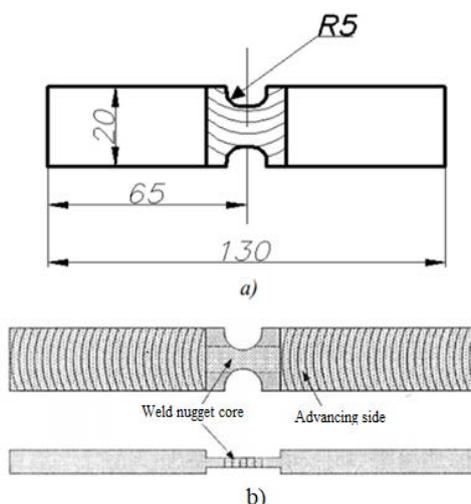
(a) Sample for determining the tensile strength of the weld metal at FSW and (b) the scheme of cutting out the sample to determine the tensile strength of the weld nugget core
